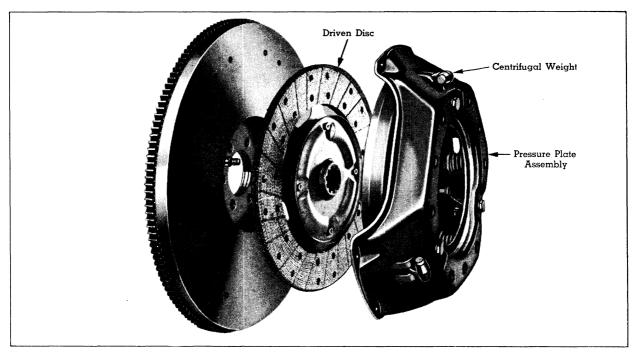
Clutch—Disassembled Typical of 40-50, 52, 62, 72, 60S and 75
